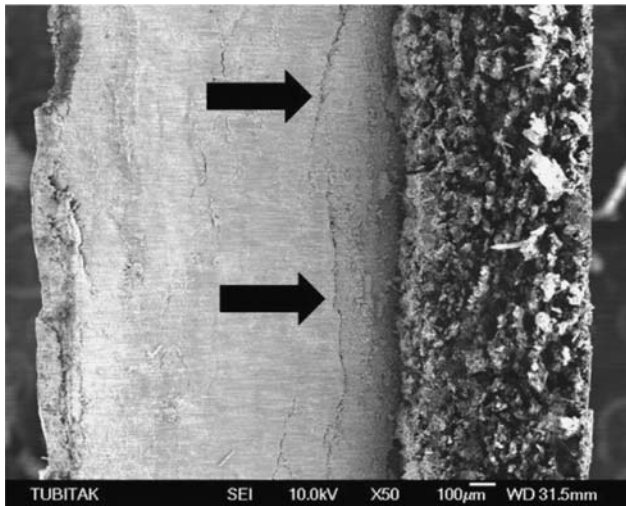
Cross-section of sample fractured after 422 impact-fatigue loading
